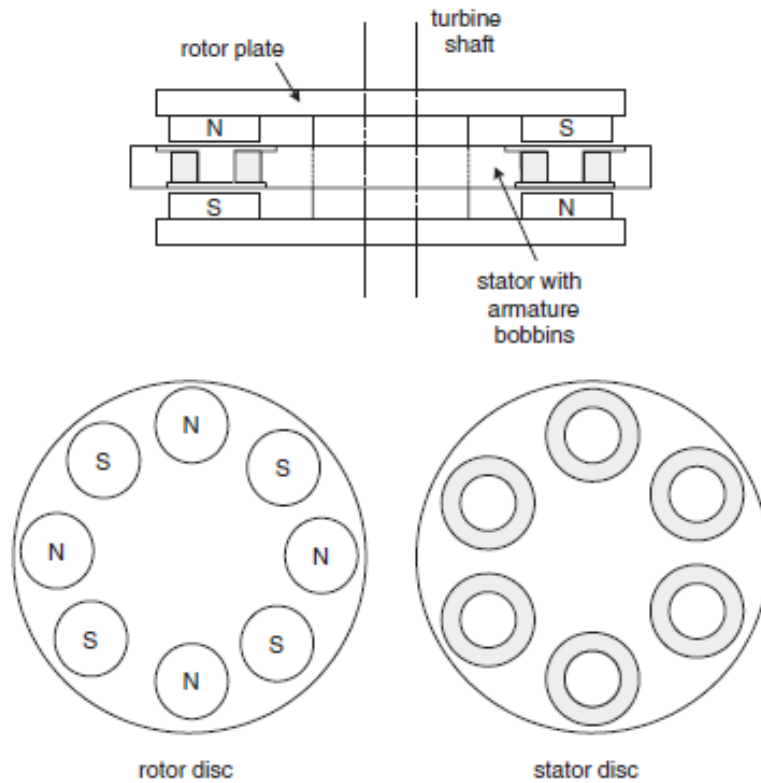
Double sided AFPM machine with air cored stator and two rotor disks having circular coils and circular PMs [73].
